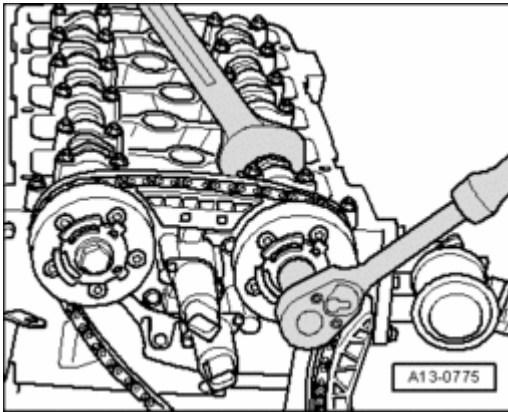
Unscrewing Securing Bolt At Camshaft Adjuster (Exhaust Side)
